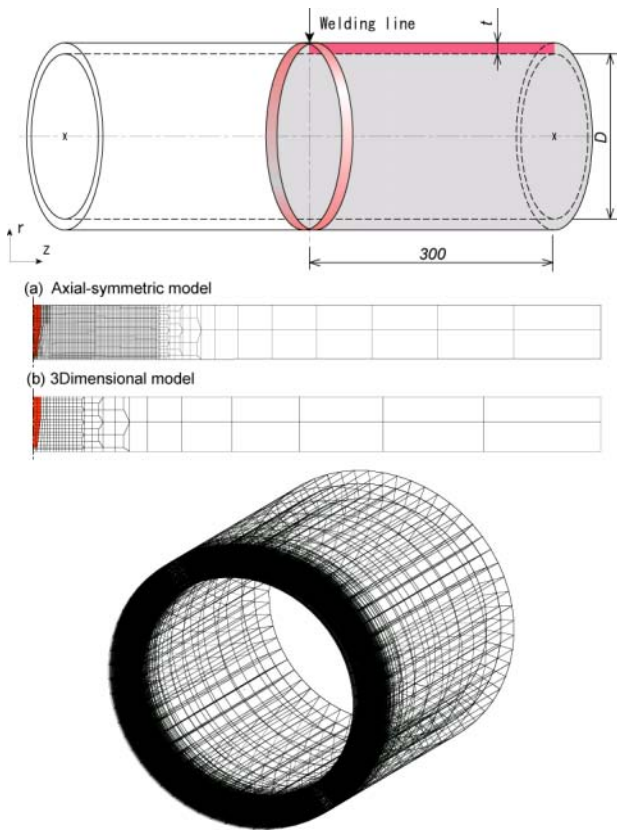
Shape of the axial-symmetric- and 3D-analysis models and those cross-section views for circumferential welding.
